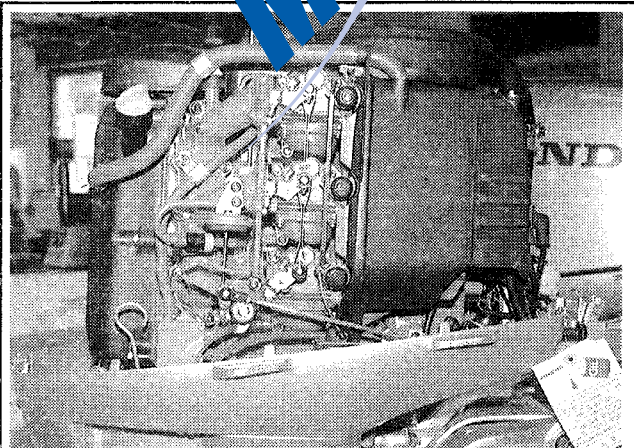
Final installation on one model of the 3-cylinder on the engines
